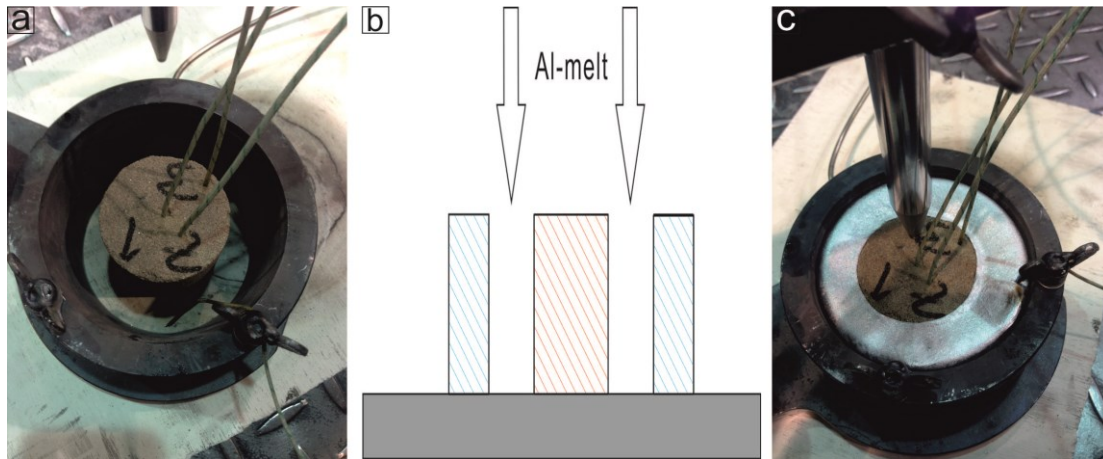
Sketch of the ring mould test with thermal couples. (a) Three thermal couples fixed into sand core and linked one thermal couples between steel ring mould and sand core
